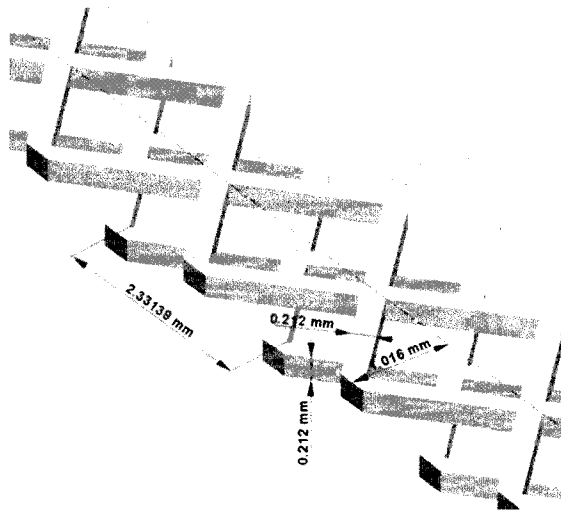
Diamond Layers Geometry and Dimension [22]
